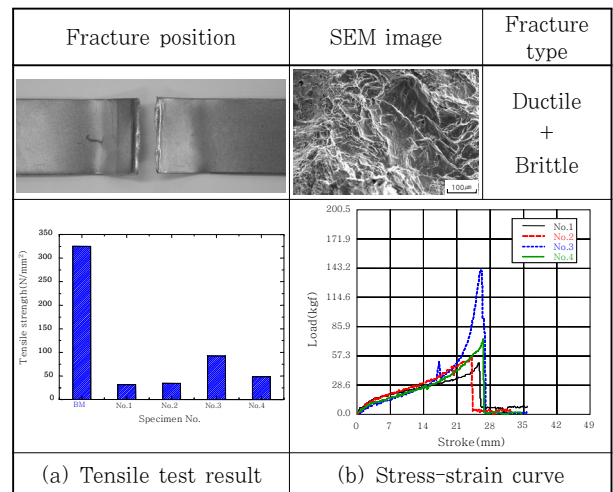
Tensile stress test results of edge weldment for titanium by GTAW
